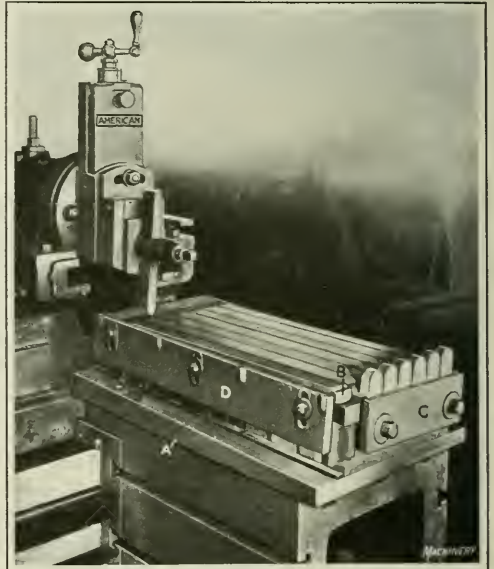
A 24-inch Shaper equipped for planing the Tapered Face of Gibs held on a Magnetic Chuck
